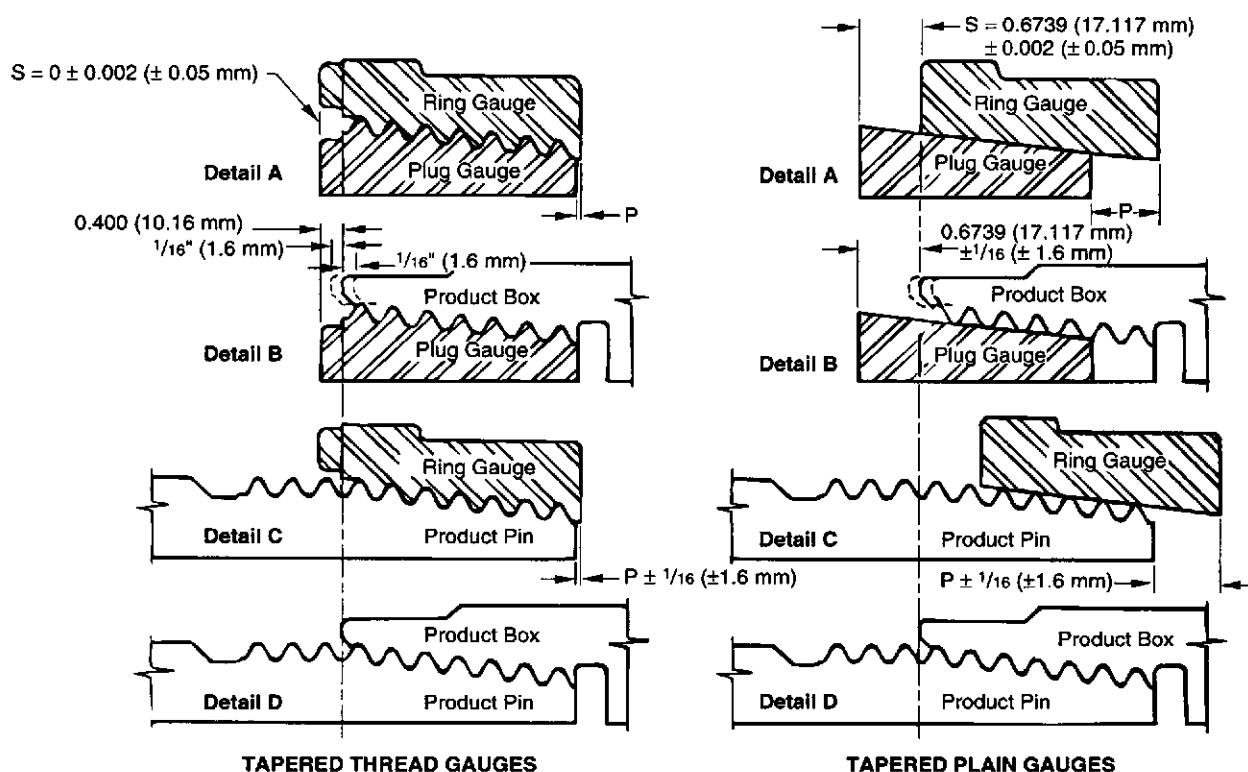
Gauging Practice for Crosshead, Crosshead Extension, and Piston Rod Connections—Tapered Thread Type
